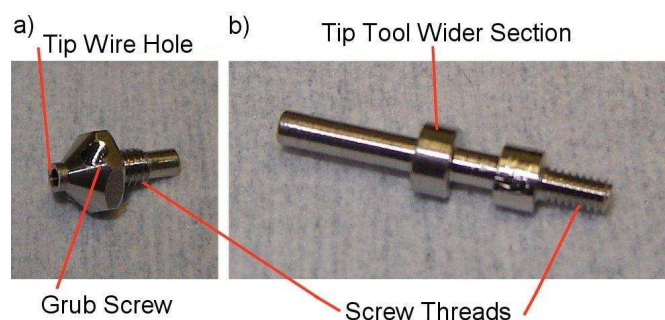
(a) Bespoke STM tip nut with a centrally bored hole for the tip wire and a grub screw to secure the tip wire in place. The back of the tip nut had a screw thread to secure into the Nanograph STM-01 scan tube and the tip nut was designed to fit into the tip tool shaft (as shown in Figure 2.12). (b) One prong (of a pair) from a UHV manipulator arm, the thinner section was used to manipulate the sample holder and tip tool whilst the wider section was only required for engaging the tip tool. A second wider section allowed the prong to secure into the UHV manipulator arm.
